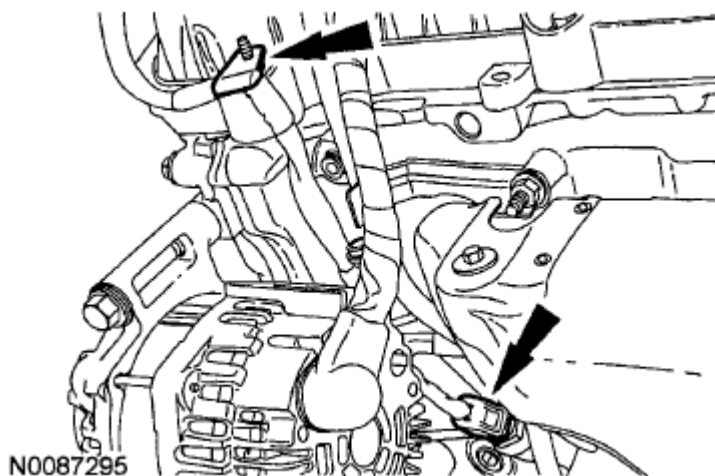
Locating Engine Oil Pressure (EOP) Switch Electrical Connector And Wiring Retainer
